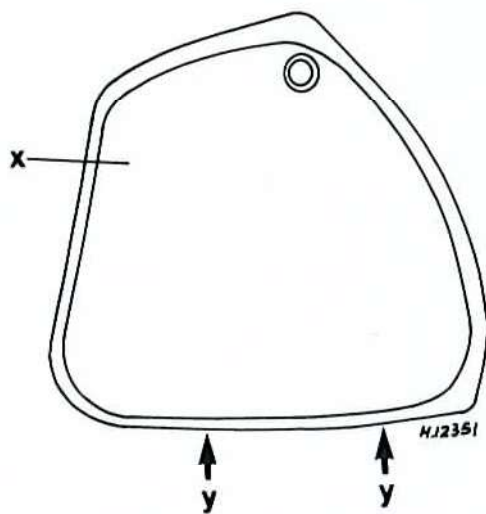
Position of fuel tank-to-floor panel spacers (Sec 14)
